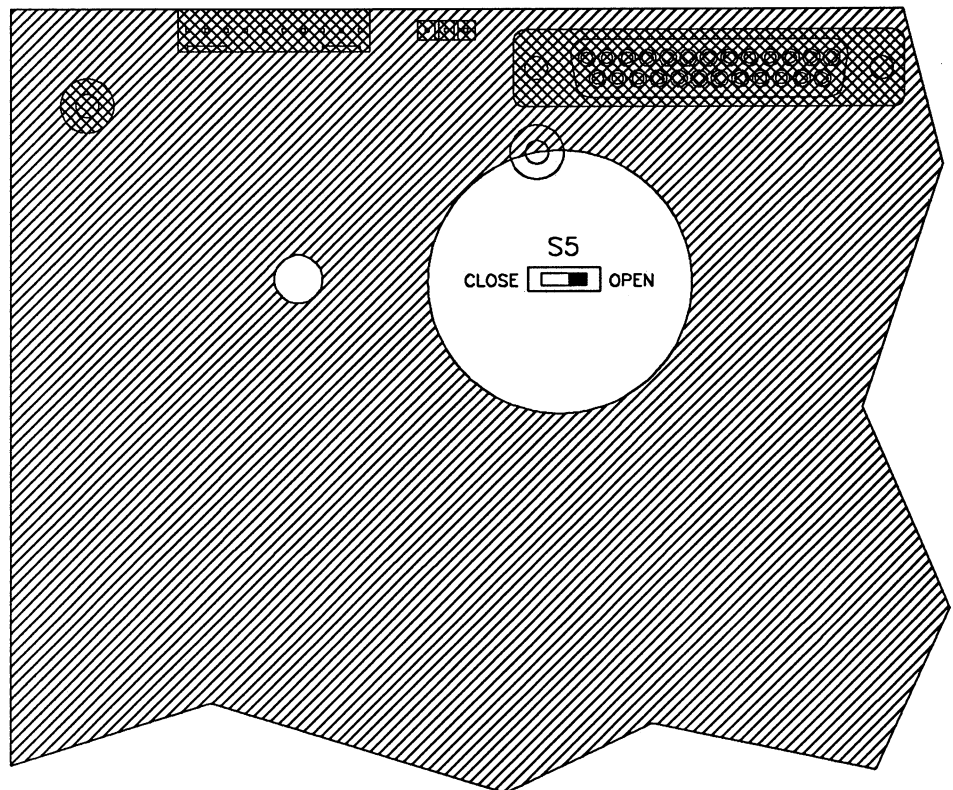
Illustration showing location of S5 switch on the motherboard (refer to Fig. 4-13, which shows the relative positions of the printed circuit boards, on page 4-48).
